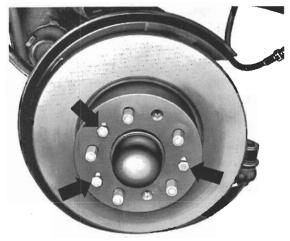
Socket head screws (arrows) that hold brake disc to front wheel hub.
